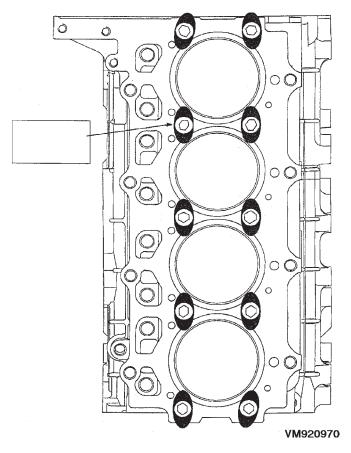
Liner Clamp Location CRANKSHAFT MAIN BEARINGS
